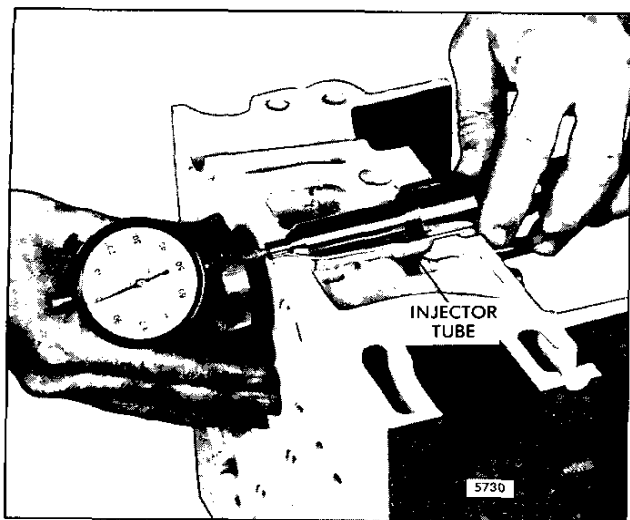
Measuring Relationship of Bevel Seat in Injector Tube to Cylinder Head Fire Deck Using Tools J 22273 and J 2
